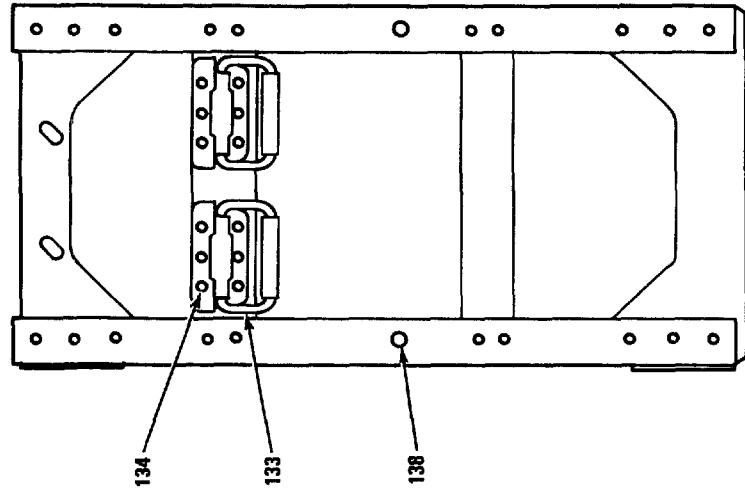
ELECTRICAL MOUNTING BASE, MT-6250/GRC-206 (SHEET 12 OF 12)
